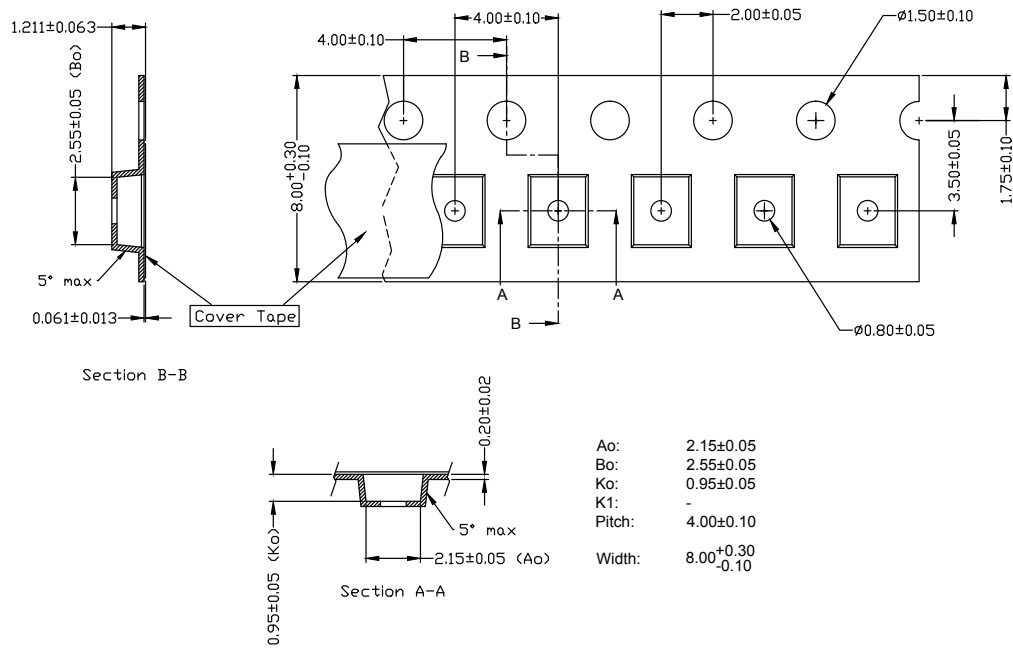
Pocket Tape dimensions for LUXEON F ES Cool White.
